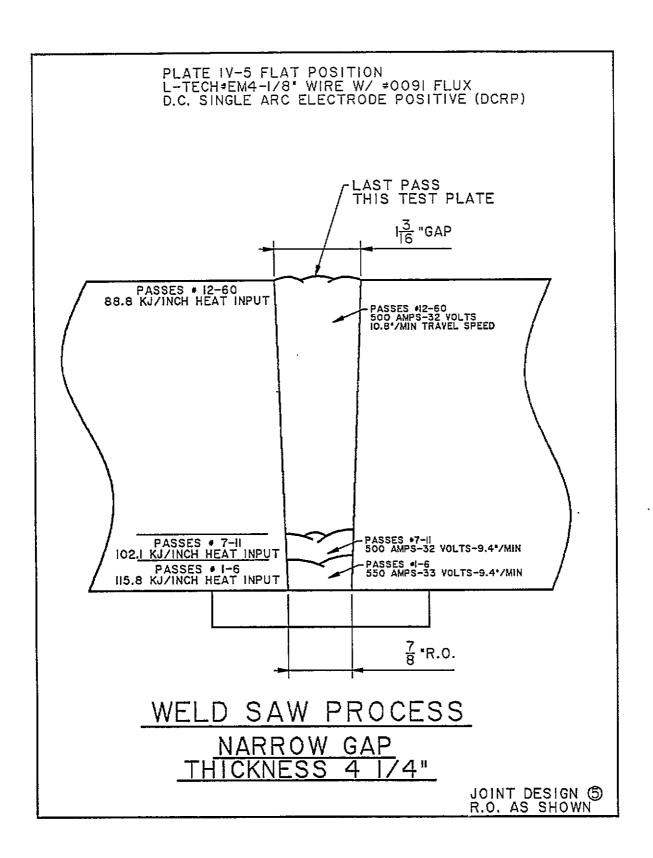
Narrow Gap Sub Arc Weld Test Assembly for 4-1/4-Inch Thick 100 ksi Yield Strength Steel Plate
